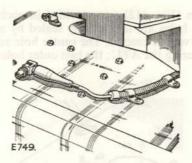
Aerial co-axials removed from dummy socket and located on front wing
